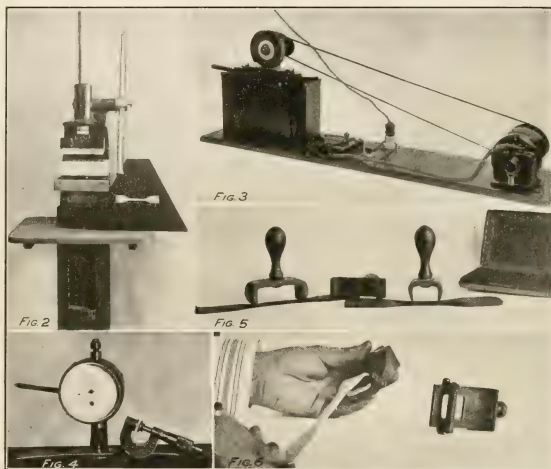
ARBOR PRESS FOR CUTTING TEST PIECES. FIG. 3. BUFFING WHEEL AND ELECTRIC DRIVE. FIG. 4. DIAL AND HAND MICROMETER. FIG. 5. GAGE MARKER (SEE FIG. 1 FOR DETAILS OF CONSTRUCTION). FIG. 6. SPECIAL JAWS FOR PURE GUM TESTS.
